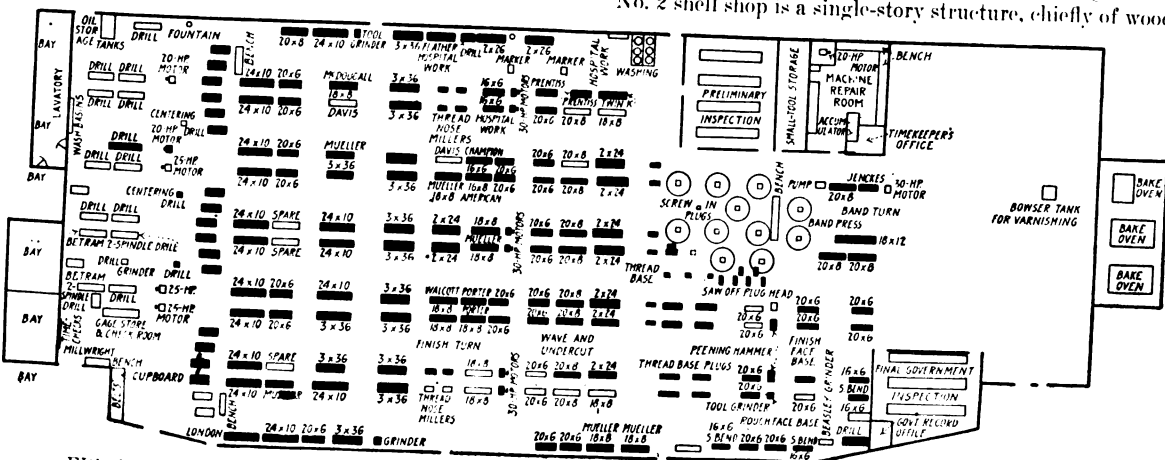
LAYOUT OF MACHINERY IN NO. 2 SHELL SHOP USED FOR MANUFACTURING THE 18-POUNDER HIGH-EXPLOSIVE SHELL
